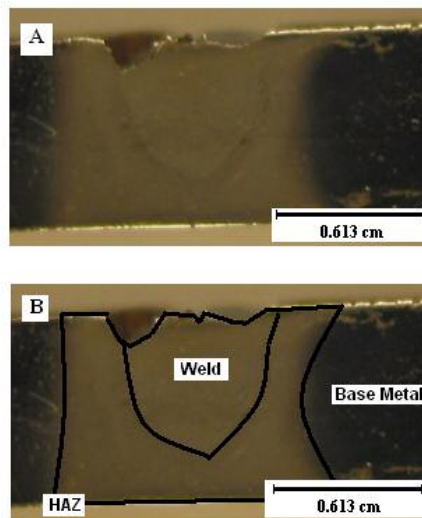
(a) Polished and etched welding coupon, 3x (b) labeled base metal, HAZ, and weld metal polished and etched welding coupon, 3x
